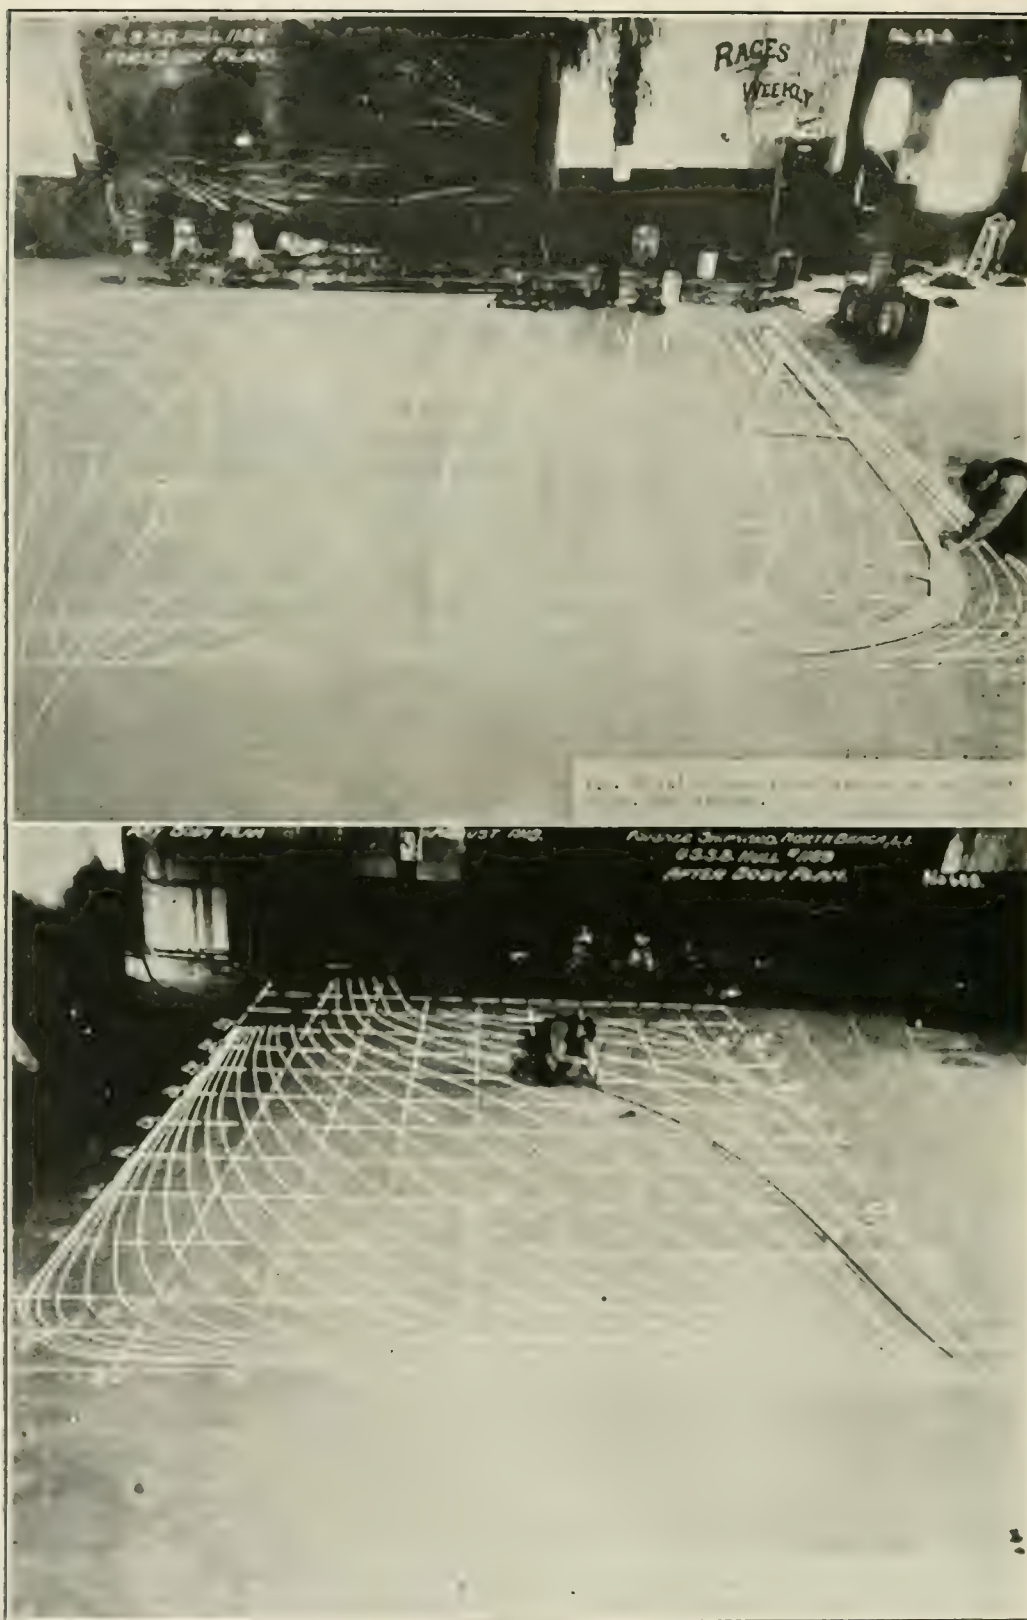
VIEWS OF MOLD LOFT FLOOR SHOWING FRAME LINES AND TEMPLATES.
